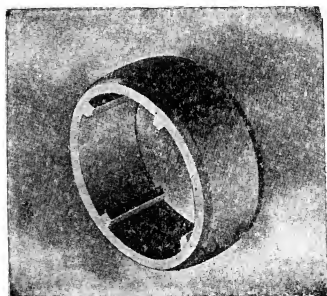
,802.—Push nipple used to join together sections of cast iron boilers. The nipple is accurately machined and has a slight taper so that when forced into the opening in the sections, by drawing the sections together by means of a rod a tight joint is obtained.
